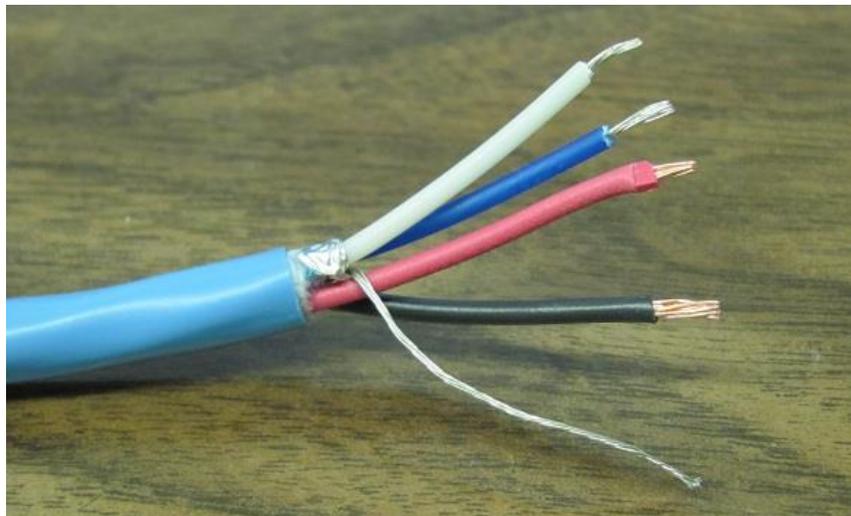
SAA cable with blue insulation removed and wires stripped. Note that the red wire was not striped back enough which will cause issues in the terminal block connection.
